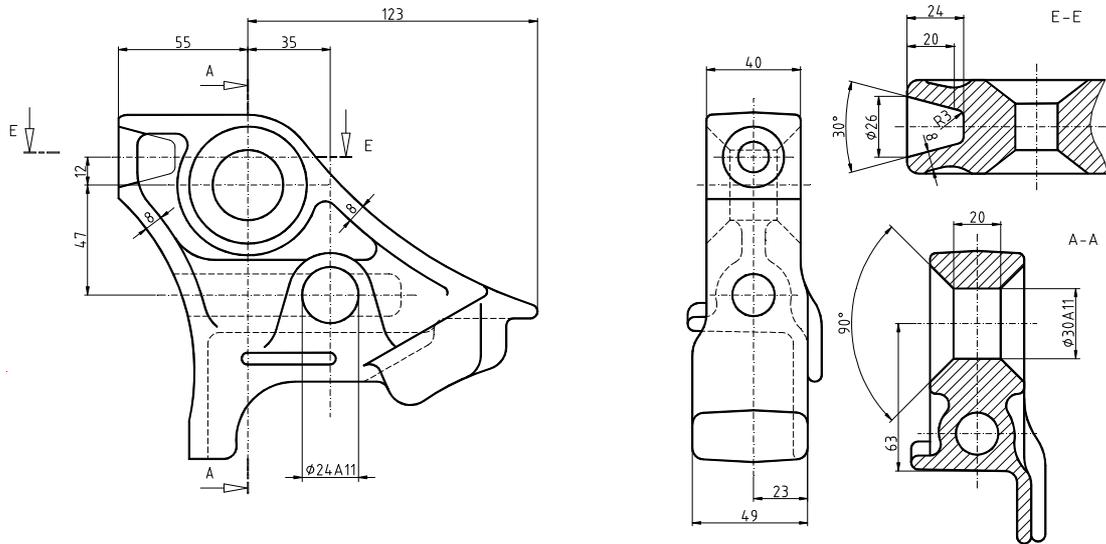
Front mounting support BM 408 (left version; welded onto the frame) MB-Nr. 408 317 00 42
